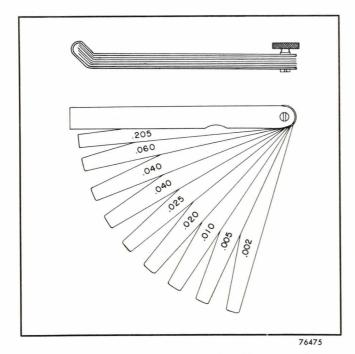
Turbine Wheel Radial Clearance Gage No. 2825
